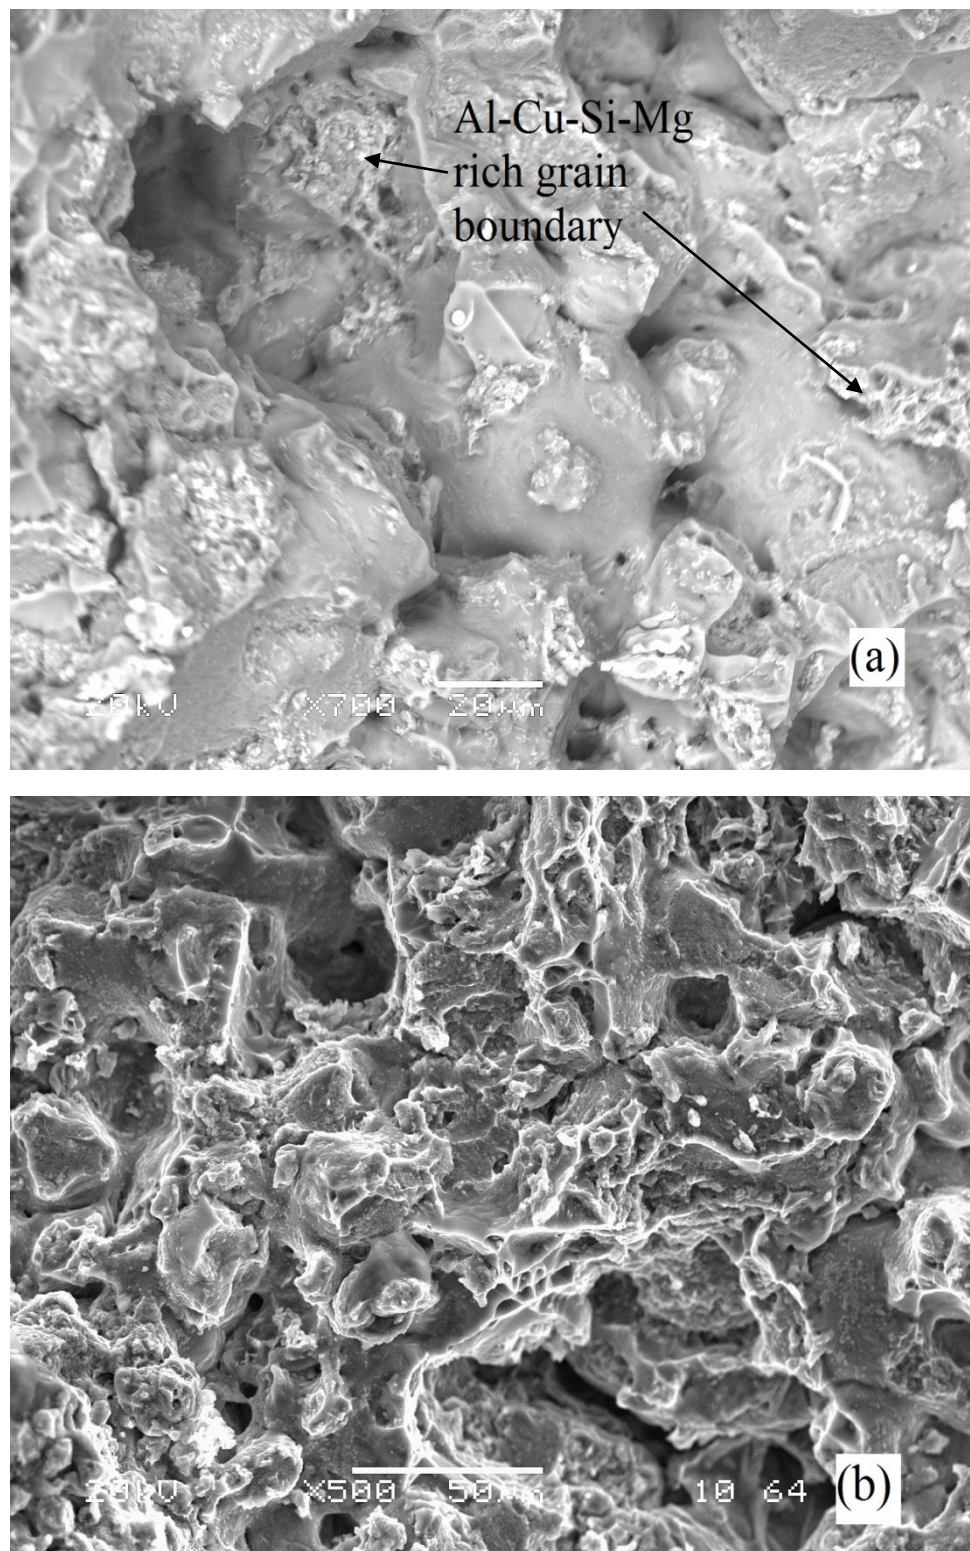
Fracture surface of Alumix 123 sintered/aged specimens compacted at (a) RT and (b) 110°C.
